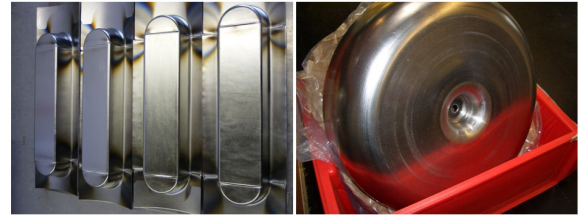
Welded girders (left), end caps of the cavity (right)
